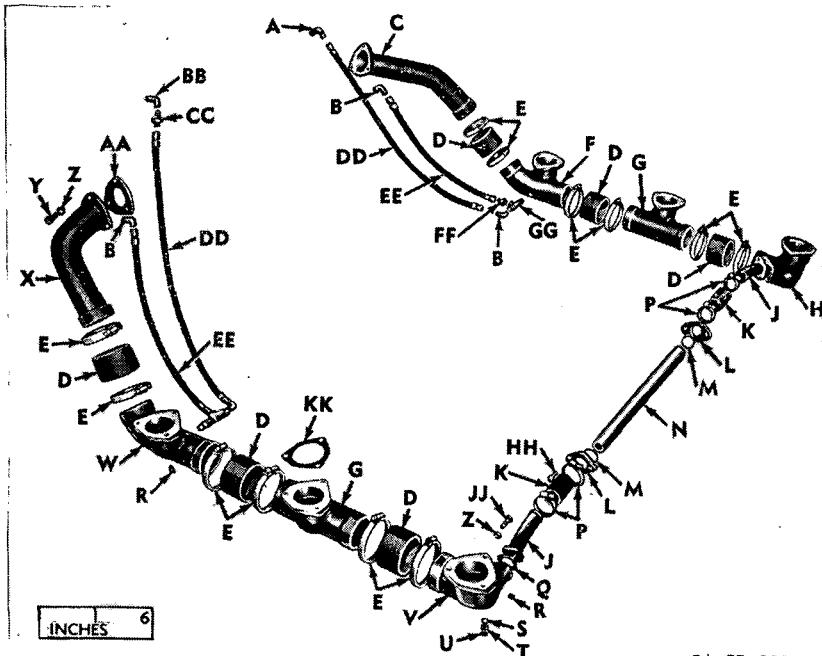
Intake manifold, balance tube and aspirators—exploded view.
